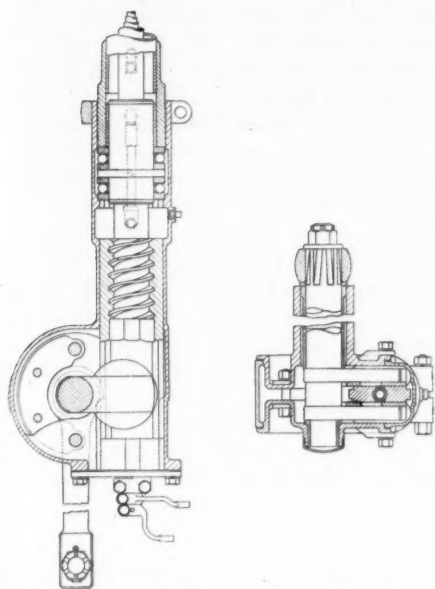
Ross screw and nut type steering gear as used by Autocar
